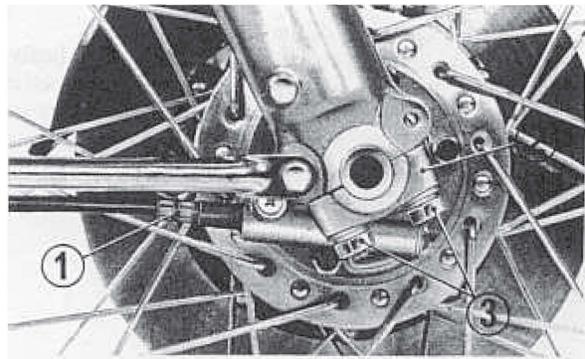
(1) Speedometer cable (2) Axle holder (3) Nut
